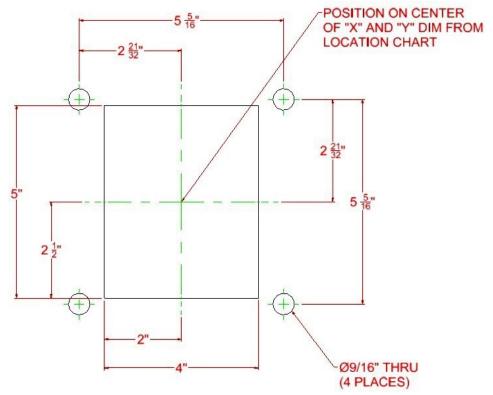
Drilling and Cutout layout for Tensioner Mounting Template
